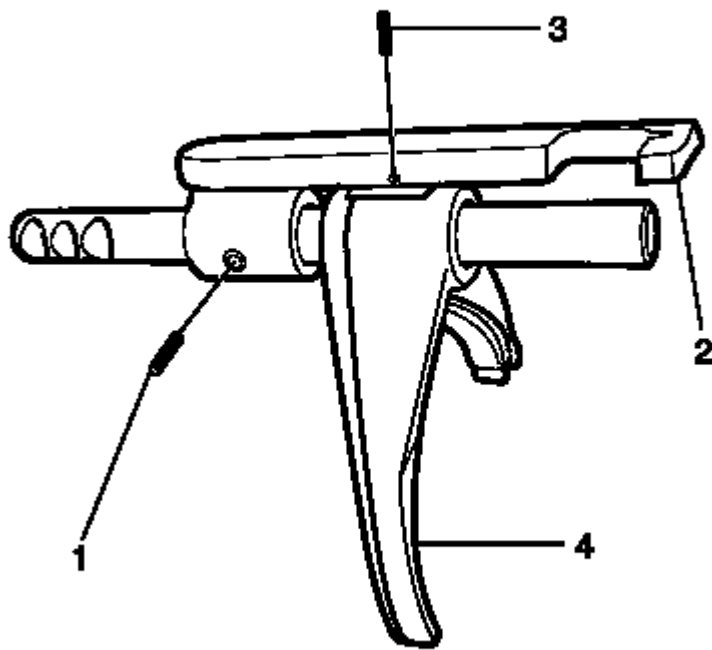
1st-2nd Gear Shift Yoke Pin And 1st-2nd Gear Shift Fork
